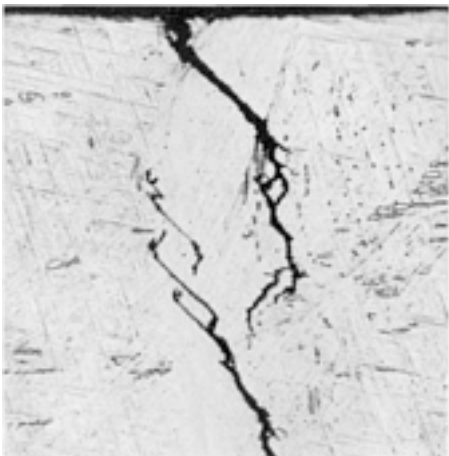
Fusion zone of a gas tungsten arc weld in a Ti-6Al-4V forging showing transgranular stress-corrosion cracks caused by contamination with soap before the weld was stress relieved for 1 h at 540 °C (1000 °F). Keller's reagent. 500 \times
